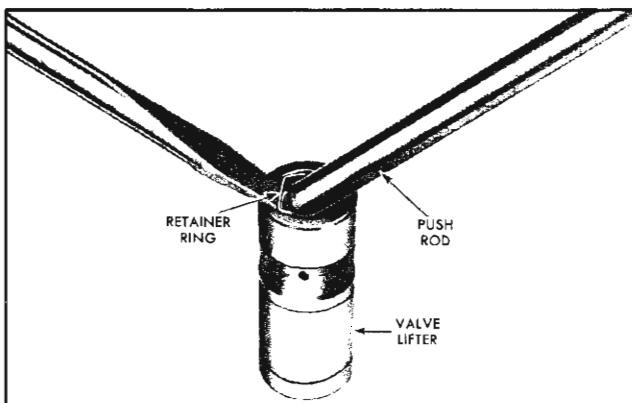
Removing Push Rod Seat Retainer Ring
